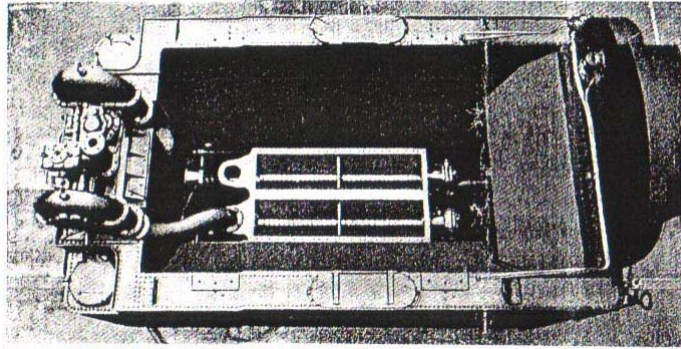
Stug tender for dust fired locomotive. View shows water tank with the fuel bunker above it removed, conveyor screws at bottom, combined drive on left.
